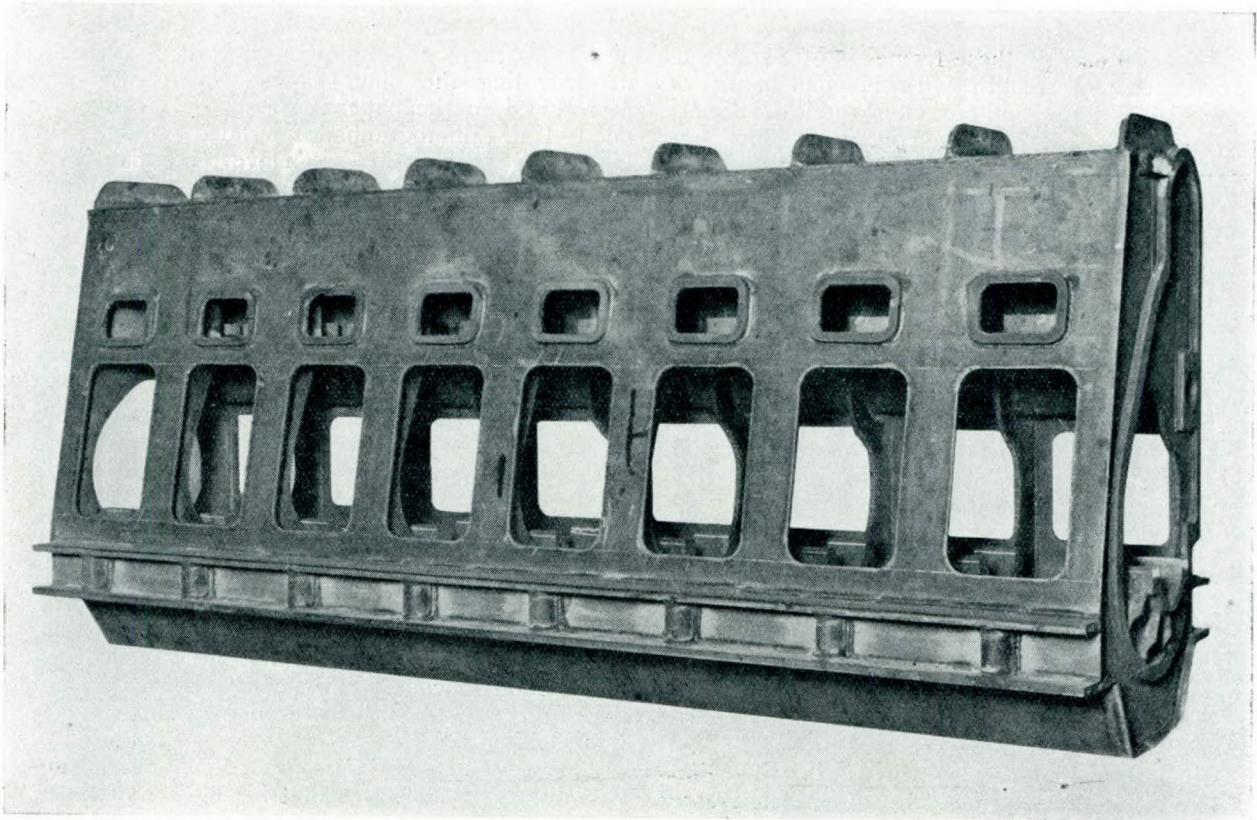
320-h.p. auxiliary engine. Back of completed frame.
